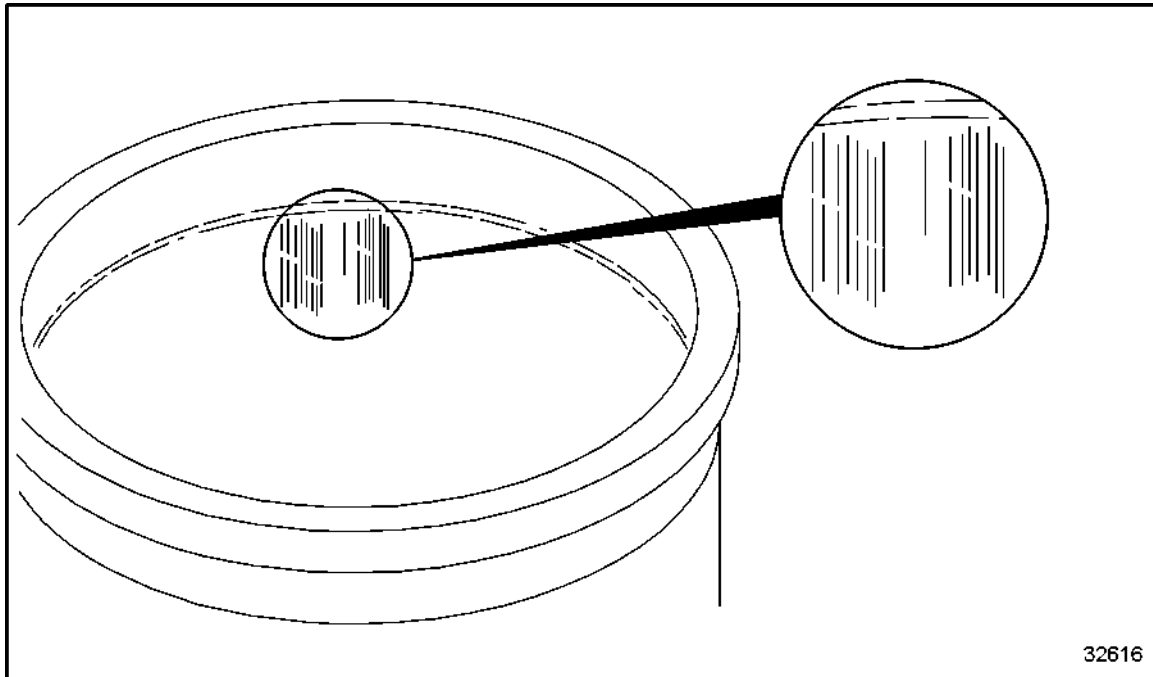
Visually Inspecting Wear Pattern of Cylinder Liner
